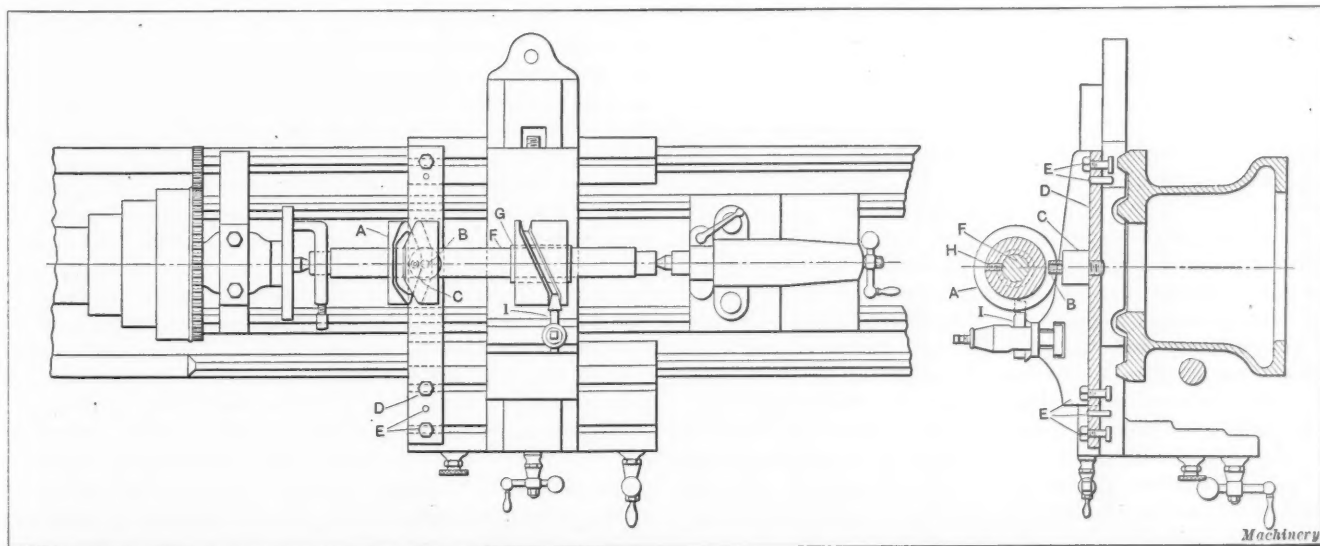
Engine Lathe equipped with Fixture for machining Barrel Cams
